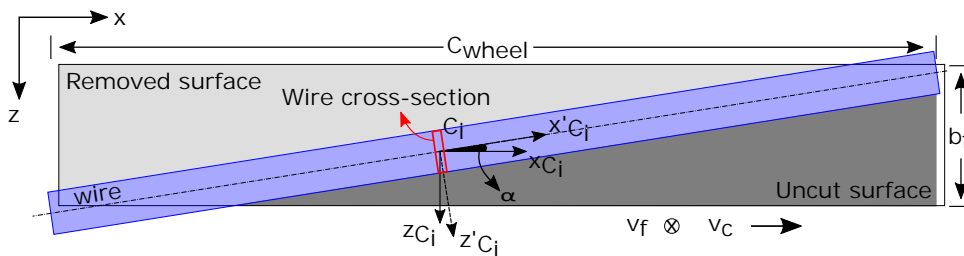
Schematics of the wire-workpiece contact shown with an open-unwrapped wire position on the workpiece surface.
